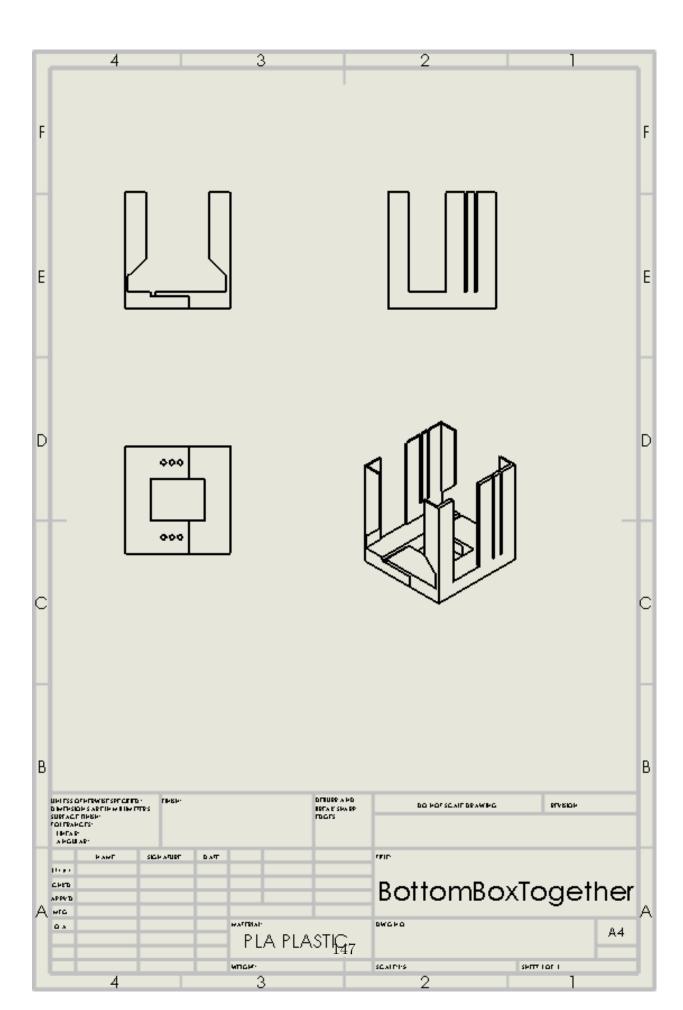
Box Bottom Dispenser Assembly Drawing (not to scale)
